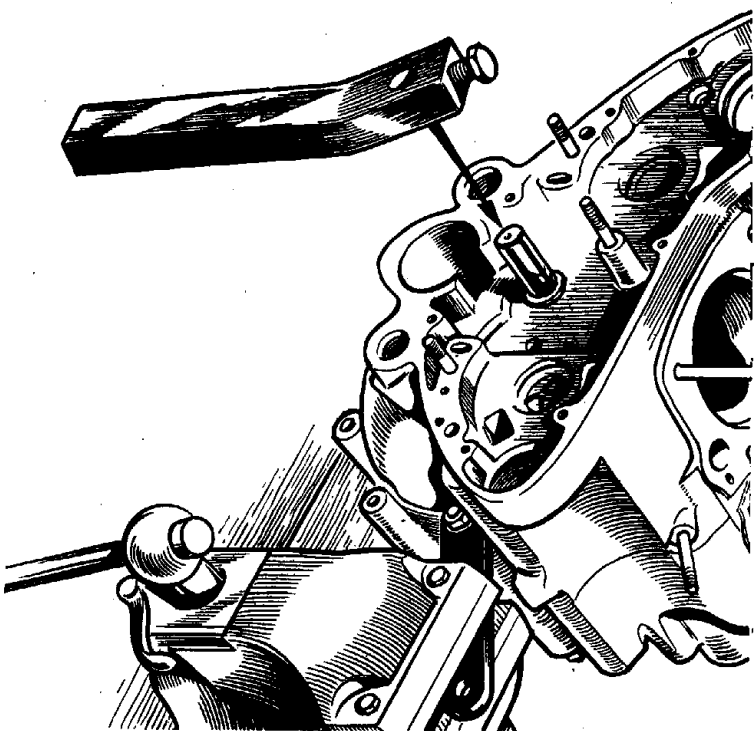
AN EASILY-MADE TOOL FOR EXTRACTING THE INTERMEDIATE TIMING GEAR SHAFT.
